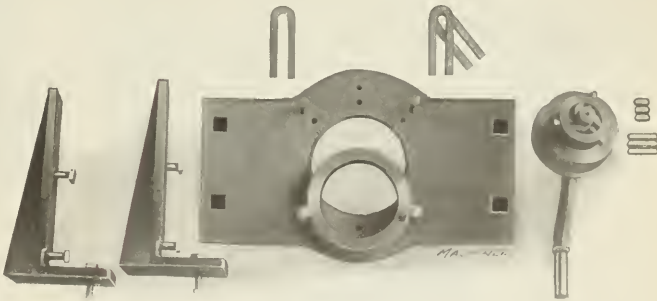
Angle-plate, Clamps, etc., for holding Work on Machine ready for grinding
